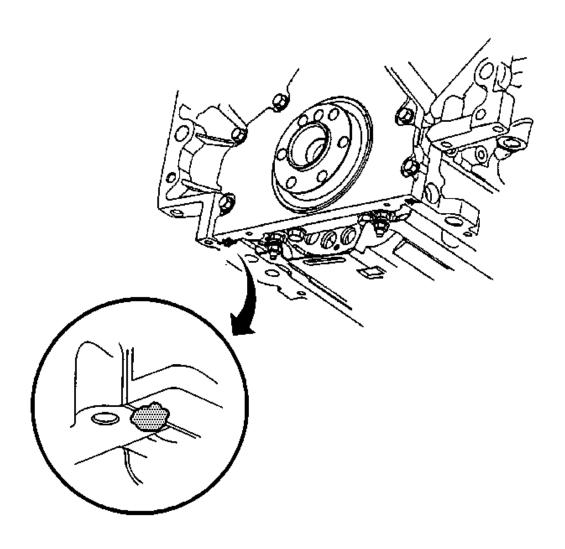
View Of Sealant Applied To Rear Oil Pan-To-Engine Block Junction Courtesy of GENERAL MOTORS CORP.
